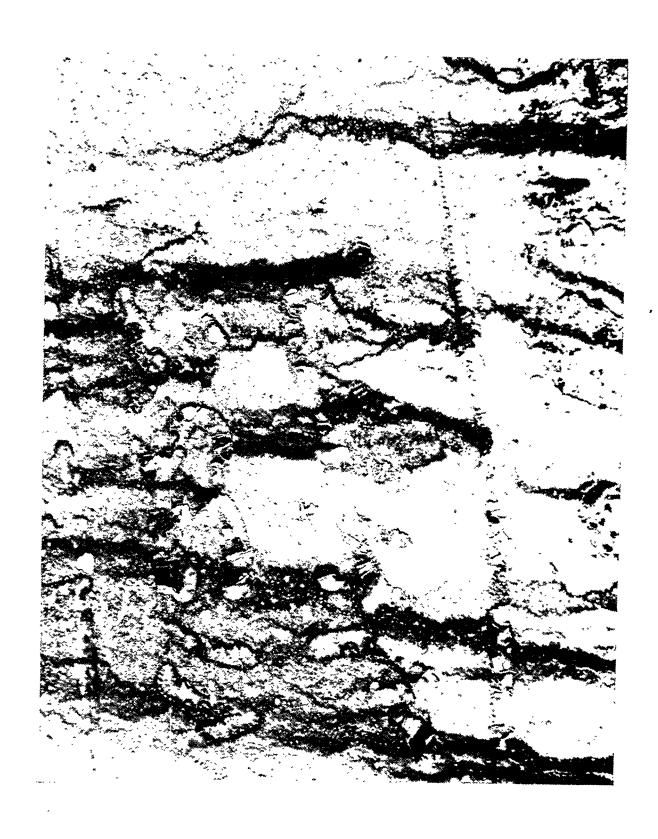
TYPICAL SALT FOG FAILURE 2-34
